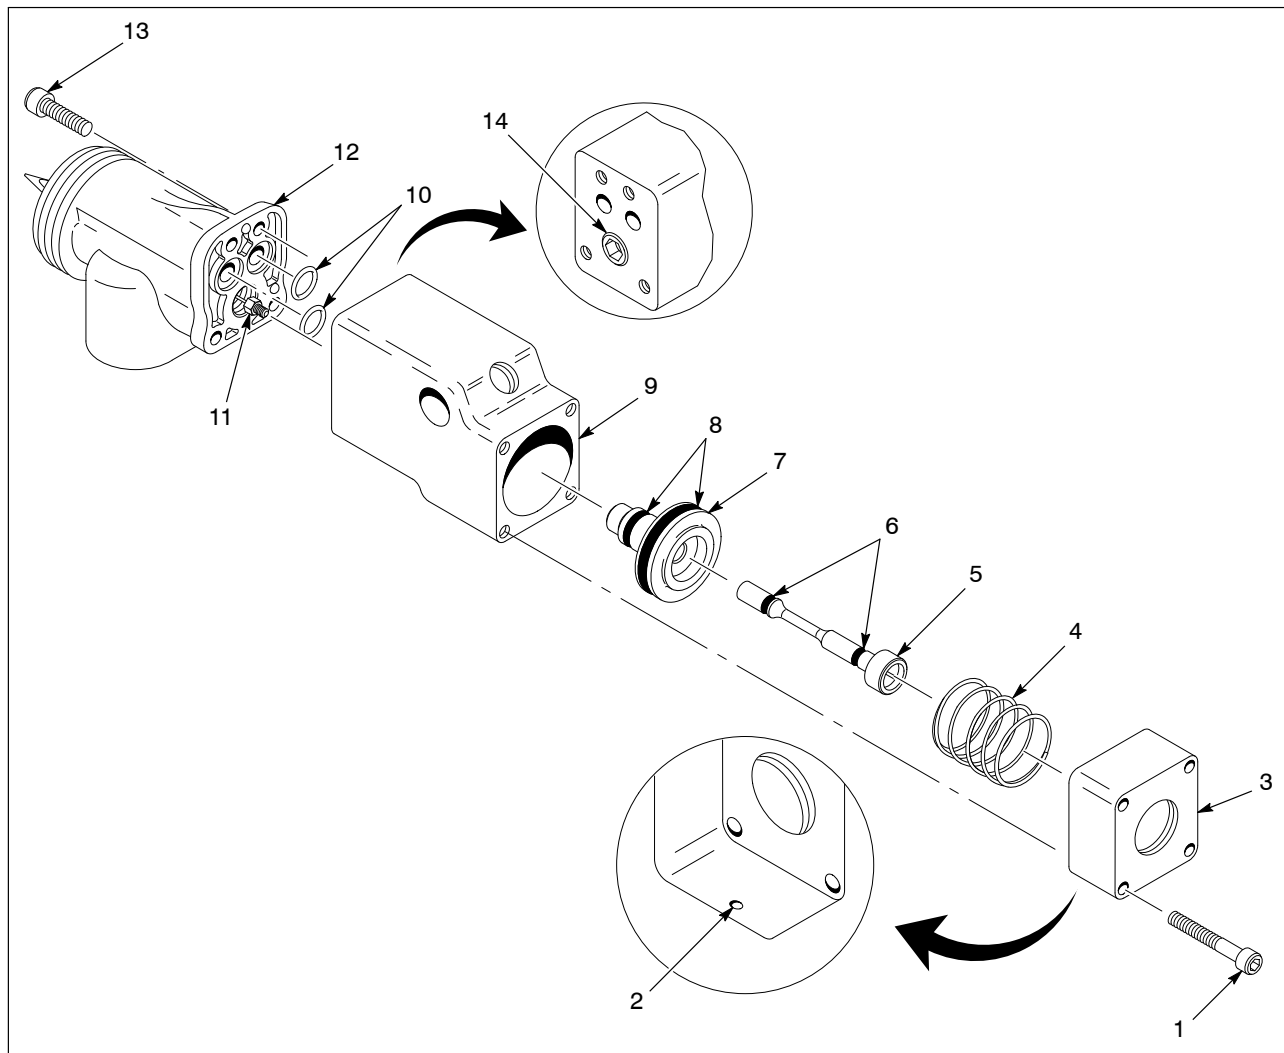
Air Piston and Connecting Rod Disassembly and Assembly
